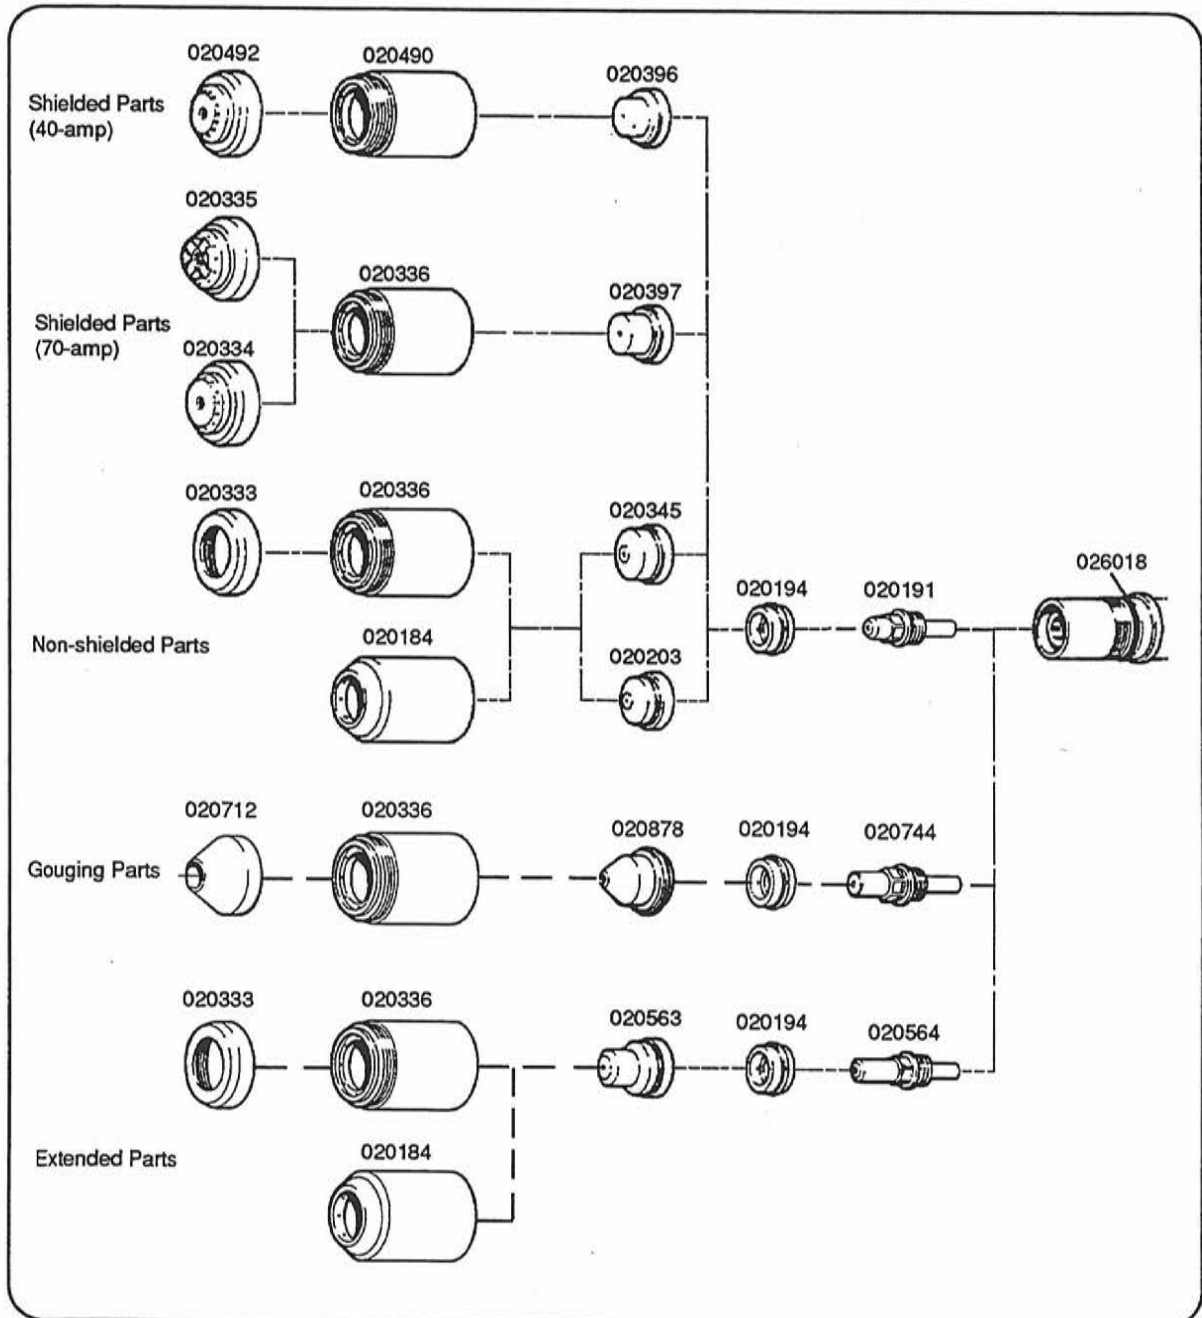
PAC130/MAX70 Machine Torch Consumable Parts
